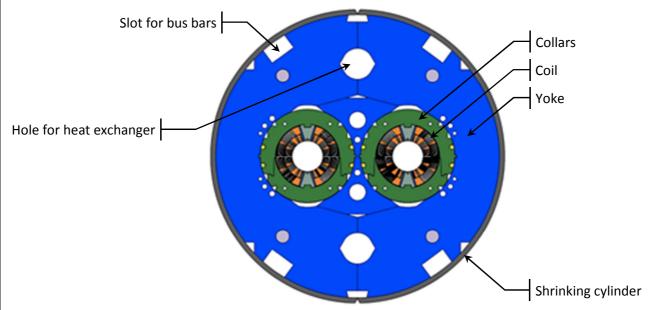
Simplified view of the cross-section of the 11 T dipole cold mass assembly.
